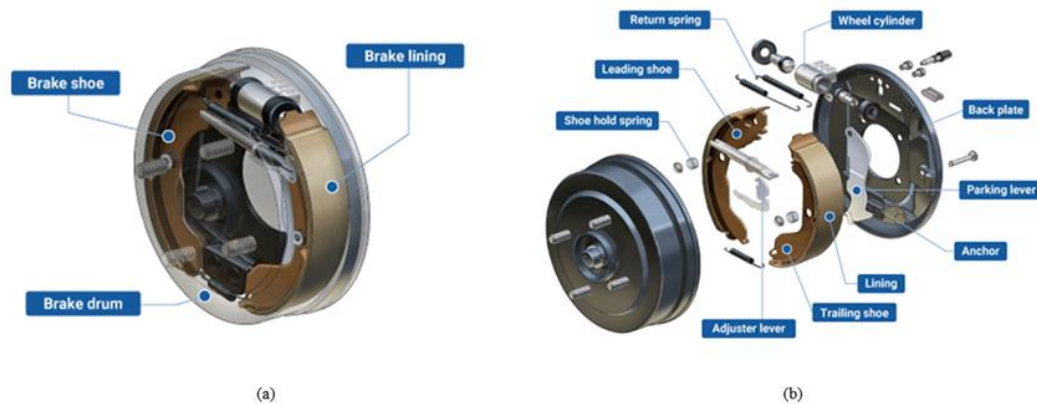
Automotive drum brake a) section cut-out view; b) exploded view. <sup>[1]</sup>
